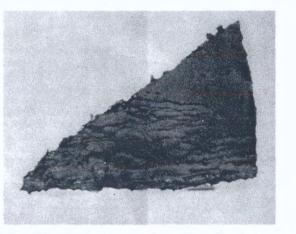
3/16" type 309 plate from cone section of annealing inner cover showing successive weld-repair-metal buildup of type 309 filler metal.
